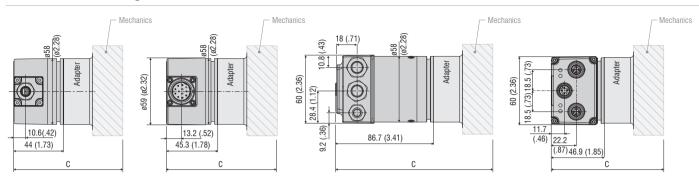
Dimensional drawing WDS- ... - P115- CR - HTL/TTL
